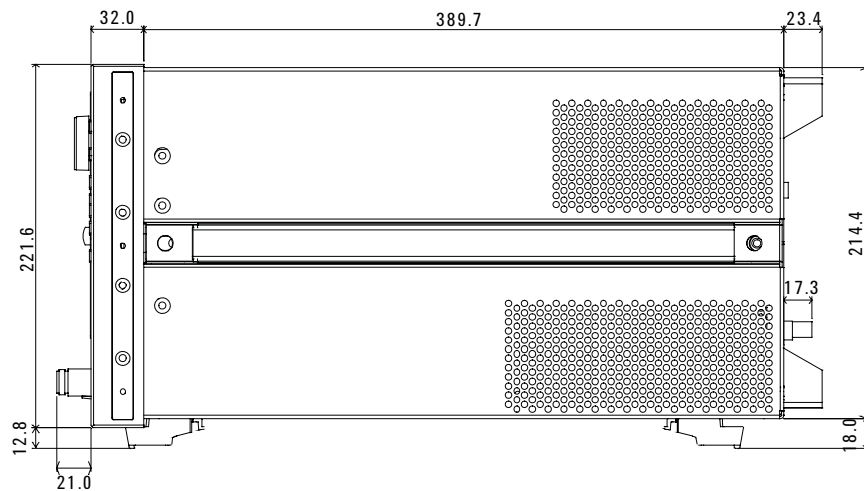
Main unit dimensions (side view, in millimeters, nominal)
